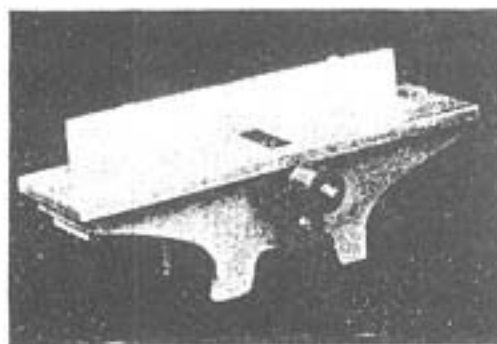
The drum sander is designed to look like a jointer of the commercial motor-driven bench type.
